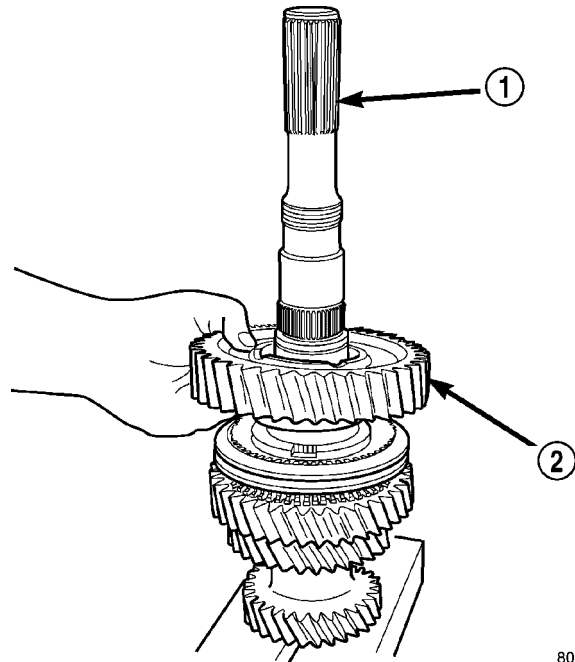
FIRST GEAR BEARING SLEEVE
